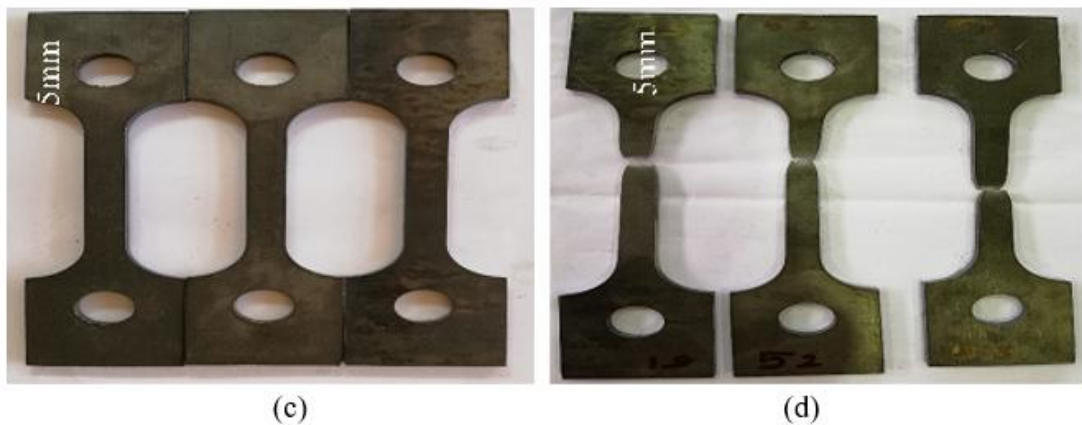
(c) Steel tube before testing (5mm), (d) steel tube after testing (5mm).
